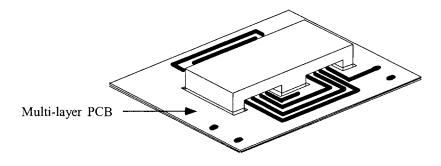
PC Board Planar Transformer in Final Assembly.
